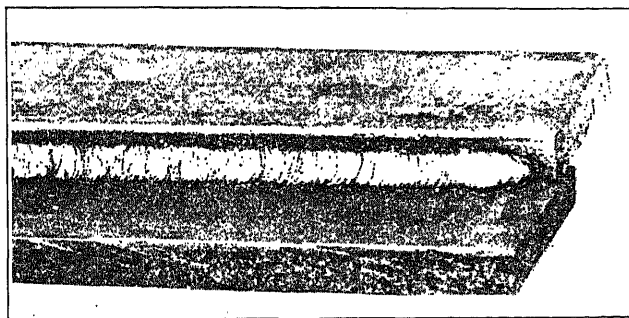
Two  $\frac{1}{2}$ -in. Ship Plates Automatically Welded by Metallic-Electrode Arc Process, Showing First of Three Layers to Form Lap Joint.
